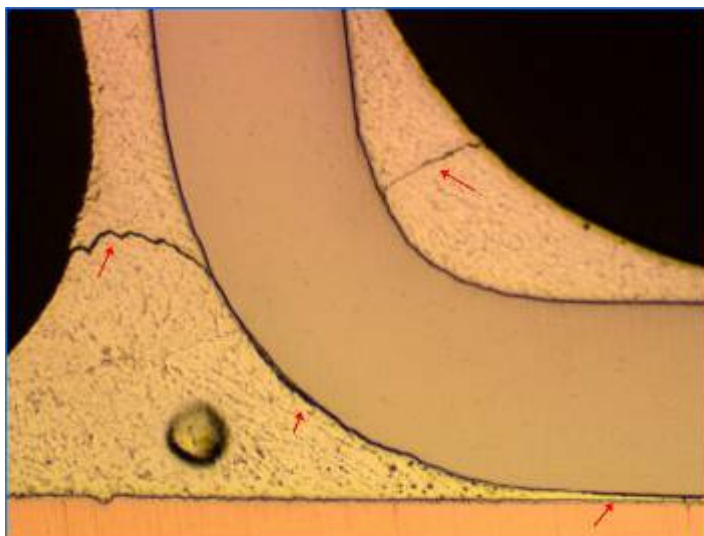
cross section, SN68, U29, right lead solder crack, 200xa
